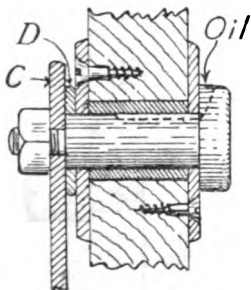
ENLARGED DETAIL OF GUIDE-PULLEY.
